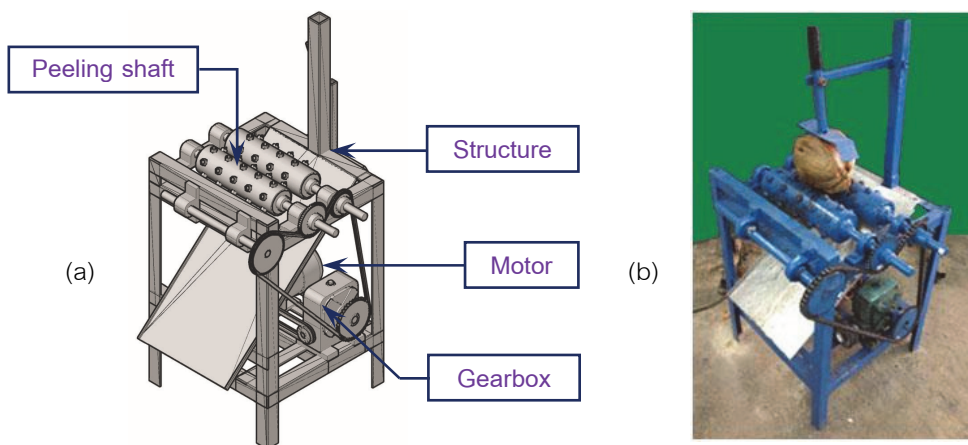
(a) Drawing of coconut peeling machine (b) Coconut peeling machine
